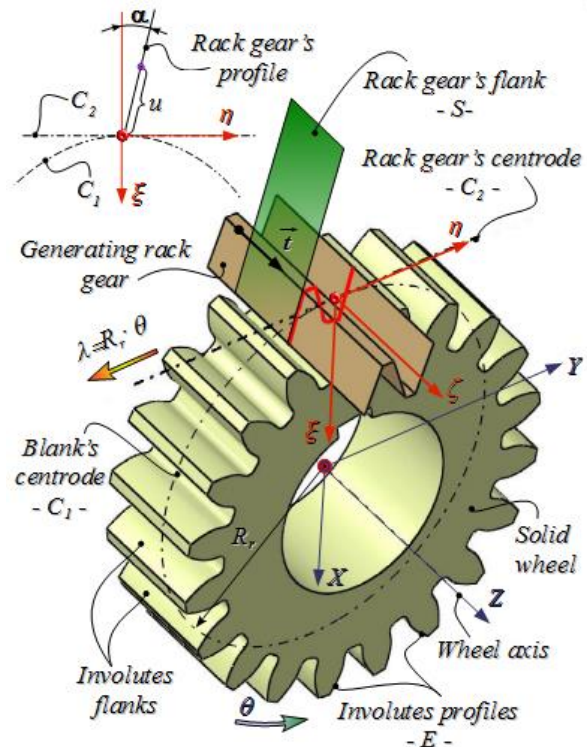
The rack gear's flank — the S plane, reciprocally enveloping with the involute flanks; reference systems; generating kinematics
